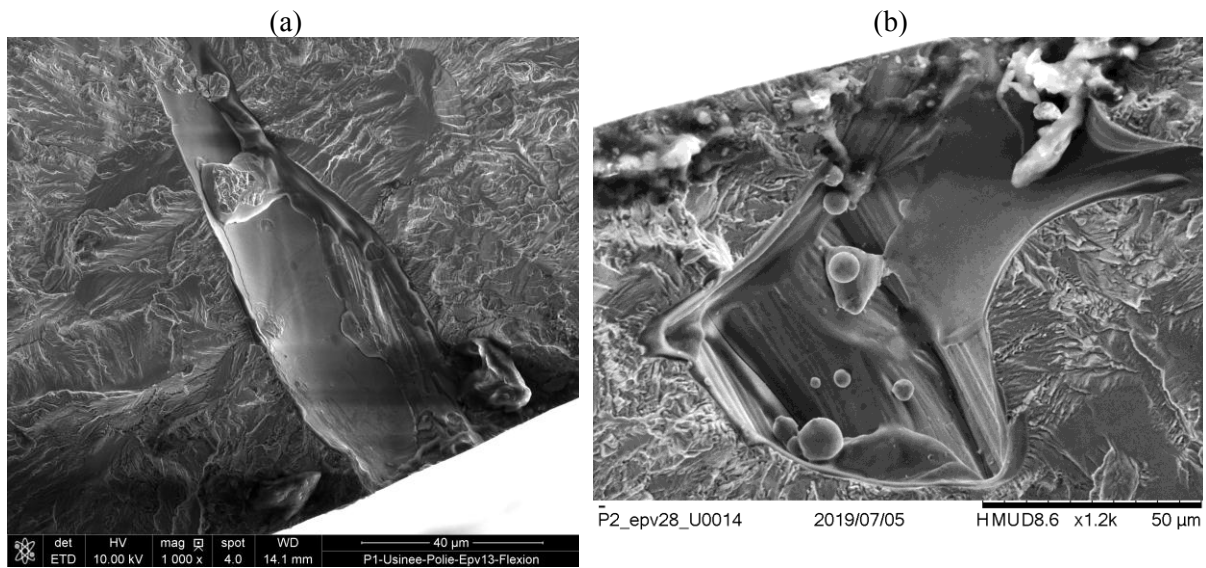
(a) Elongated shaped defect (b) and irregular shaped defect at fatigue crack initiation site
